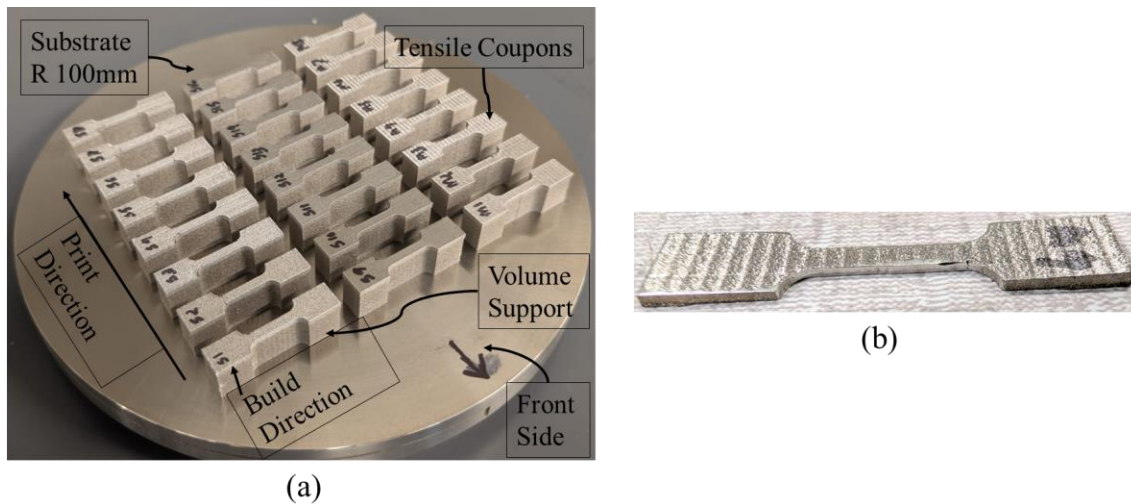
(a) Printed tensile coupons on the baseplate. (b) Removed sample (M4) from baseplate.
